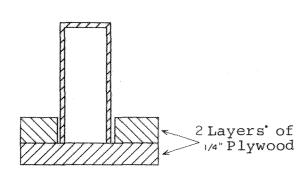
B END VIEW OF MOUNTED LAMPHOUSING.
